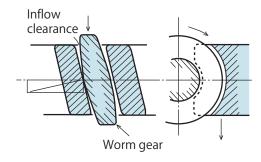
Line of contact for Worm gear pair (2 number of threads) and Tooth bearing for standard Worm gear. Quoted literature is the same as Fig. 5.
